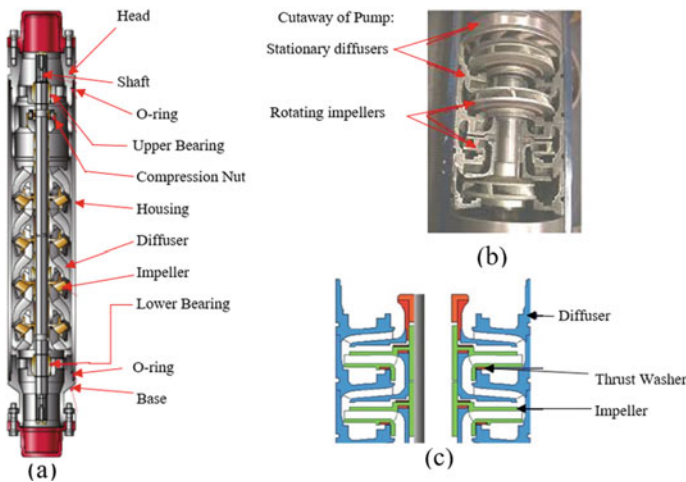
Main parts of ESP: a multistage ESP components, b cutaway of pump, and c impeller and diffuser [1]
